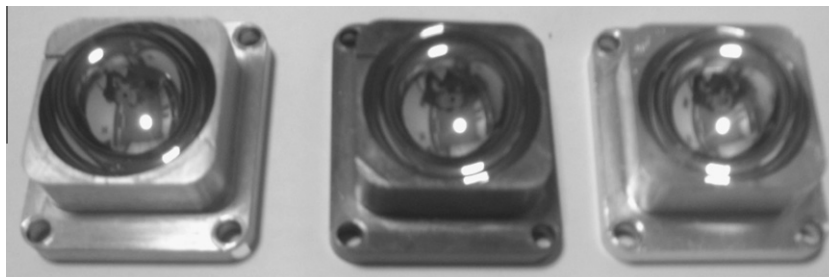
Cavity inserts with spherical concave surfaces machined using an ultra-precision turning machine.
